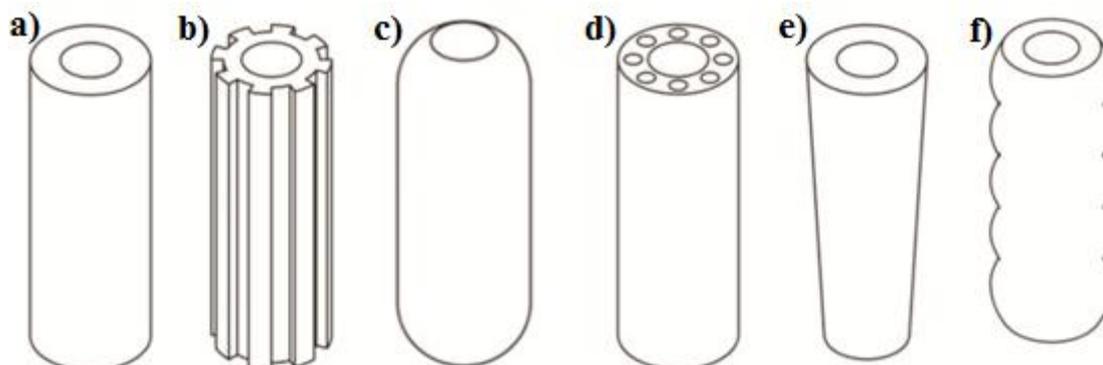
The designs of gravel pack a) solid cylinder, b) longitudinally ribbed cylinder, c) capsule, d) cylinder with longitudinal holes for fluid to flow, f) and e) cylinders of changing diameter.
